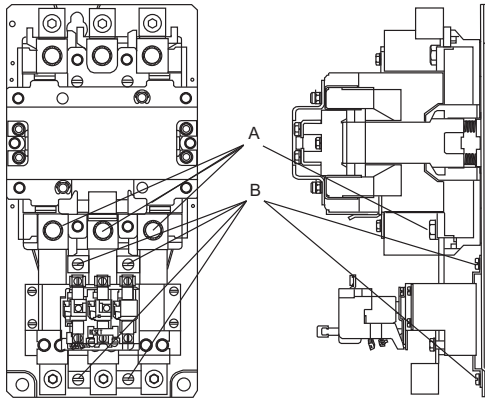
Removing Melting Alloy OLR with 3 CTs /
